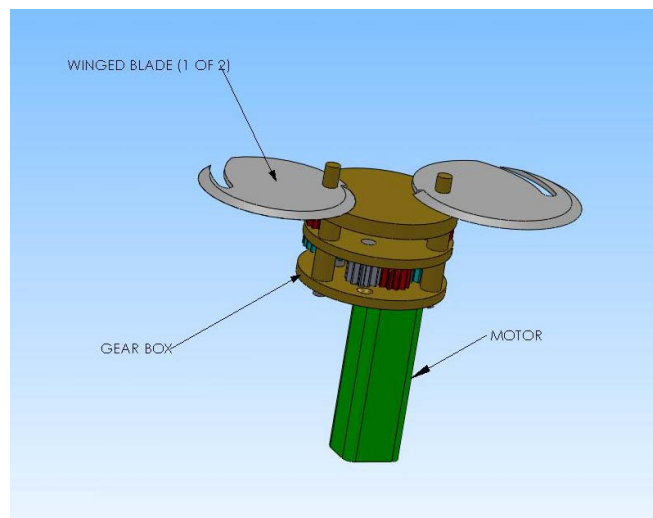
SolidWorks software rendition of the gearing mechanism and motor driving the deployment of the stainless steel wing attachments for the implantable tag. This design has been built and bench tested.
